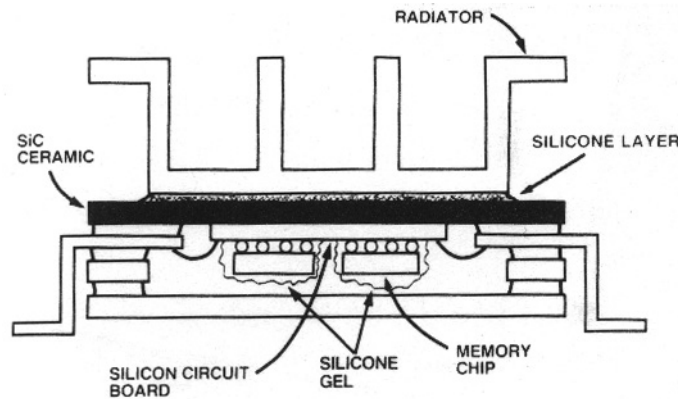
Multichip package for memory module in a Hitachi high-performance computer [4.18]. The module contains 6 ECL chips, mounted by flip chip.
